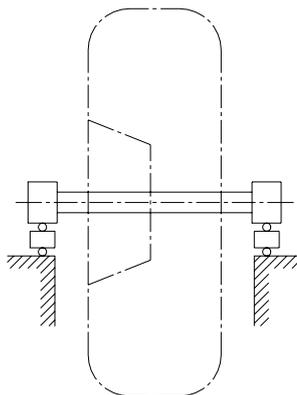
Measuring system with physical support of the rotor outside the machine housing
